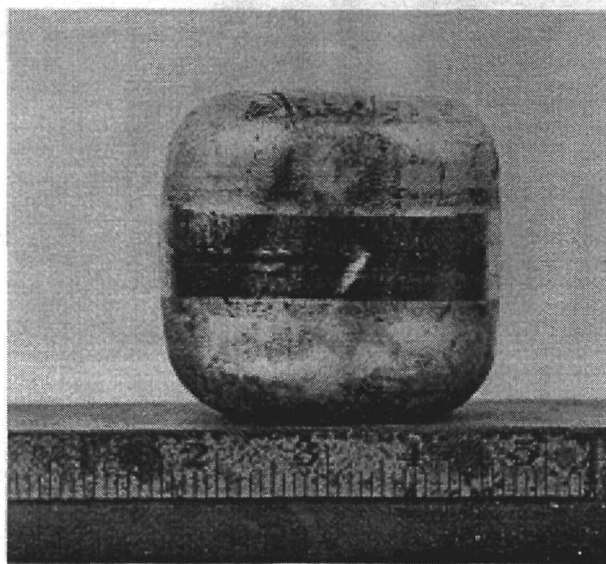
The impact face of capsule FC-152 contained a deep crease; 1.5X.
